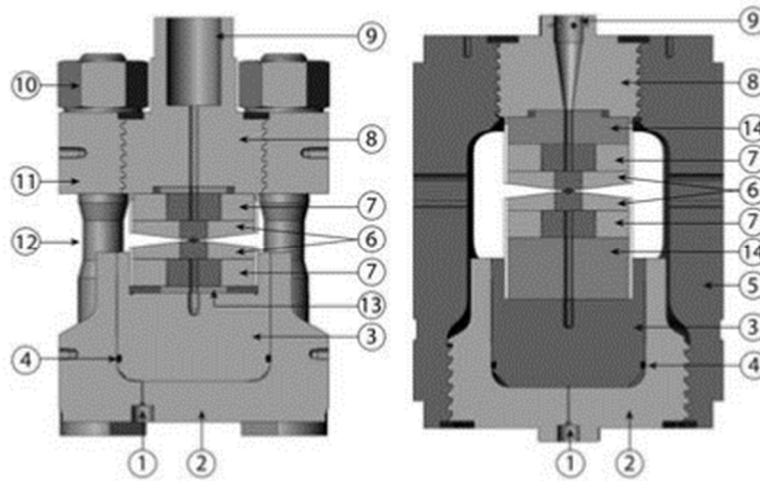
Cross section of PE press (V-type left, VX-type right). (1) Hydraulic fluid inlet, (2) cylinder, (3) piston, (4) O-ring seal, (5) load frame, (6) anvils, (7) TC backing plates (seats), (8) breech, (9) front collimator, (10) nut, (11) top platen, (12) tie rod, (13) backing disc, (14) steel spacer. Image from Klotz⁵².
